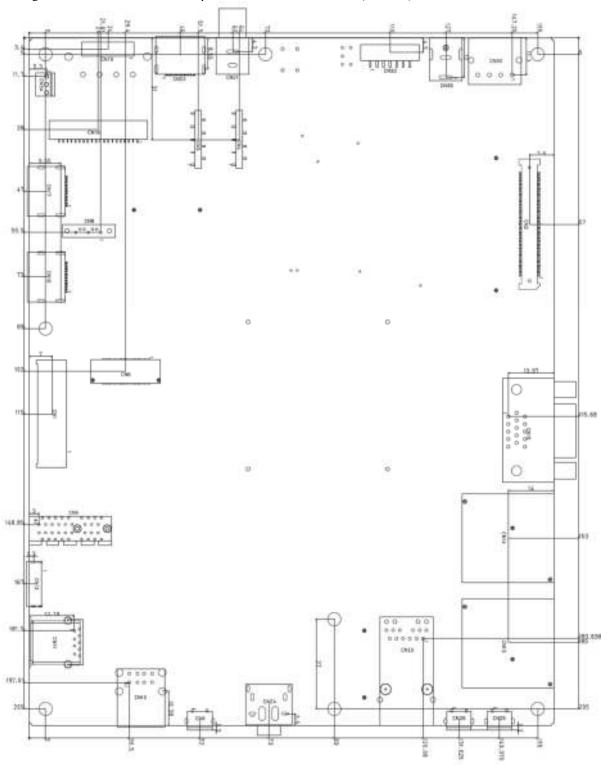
Locations of Connector on the Salvator-X Board (Component Surface) (Top View)
